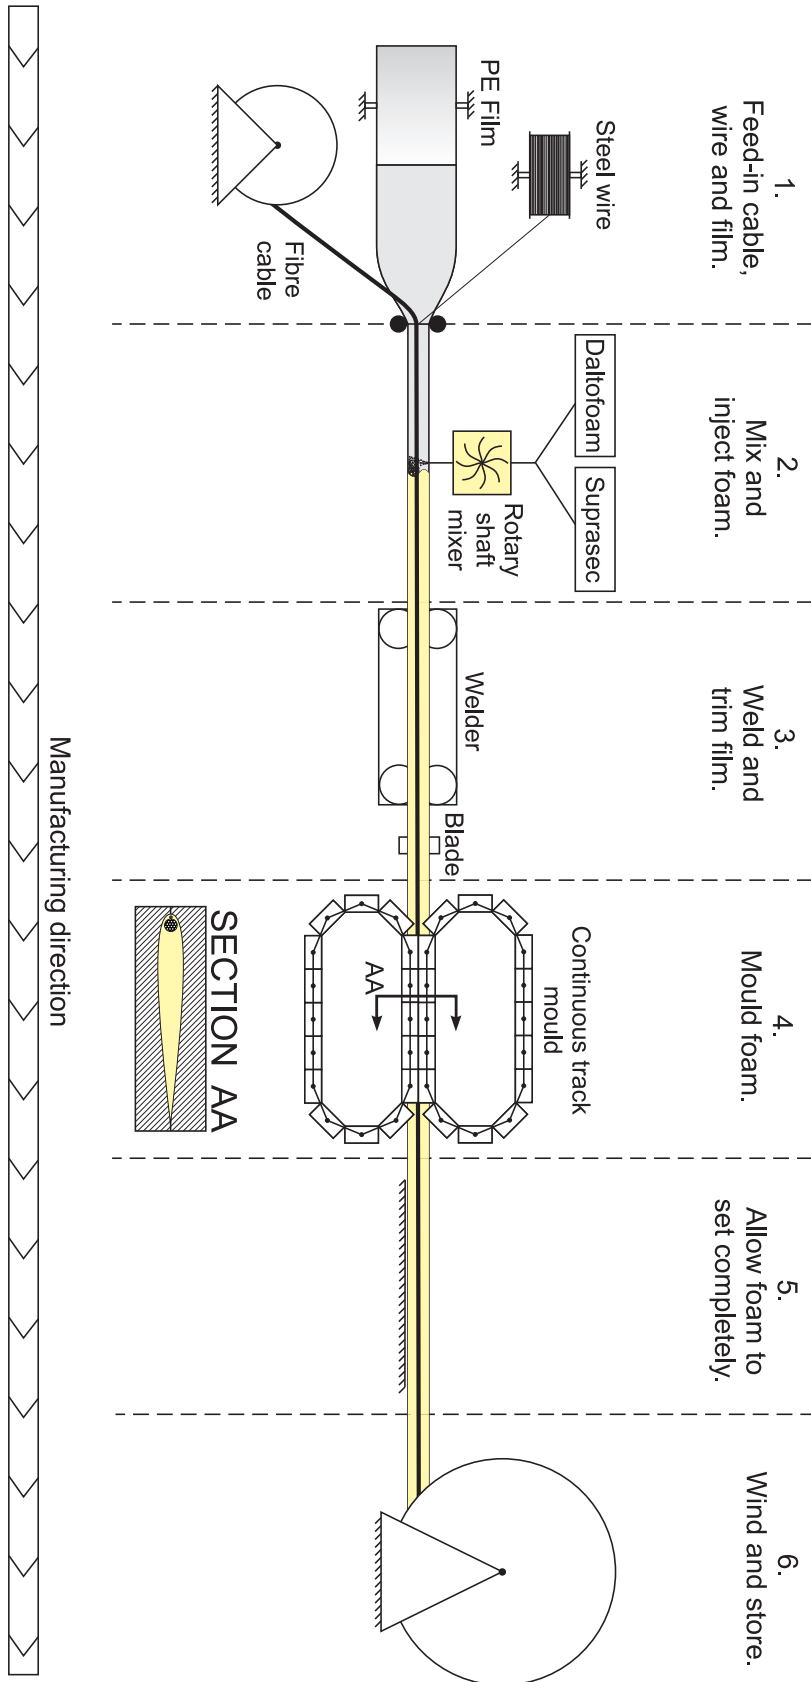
Schematic of streamlined cable manufacturing process and machine.
